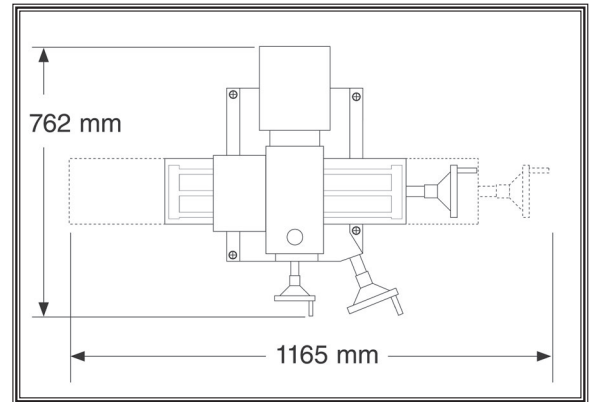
Minimum working clearances and mill mounting bolt pattern.
